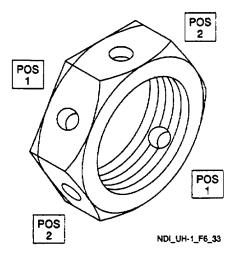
Tail Rotor Control Tube and Quill - Retaining Nut.
